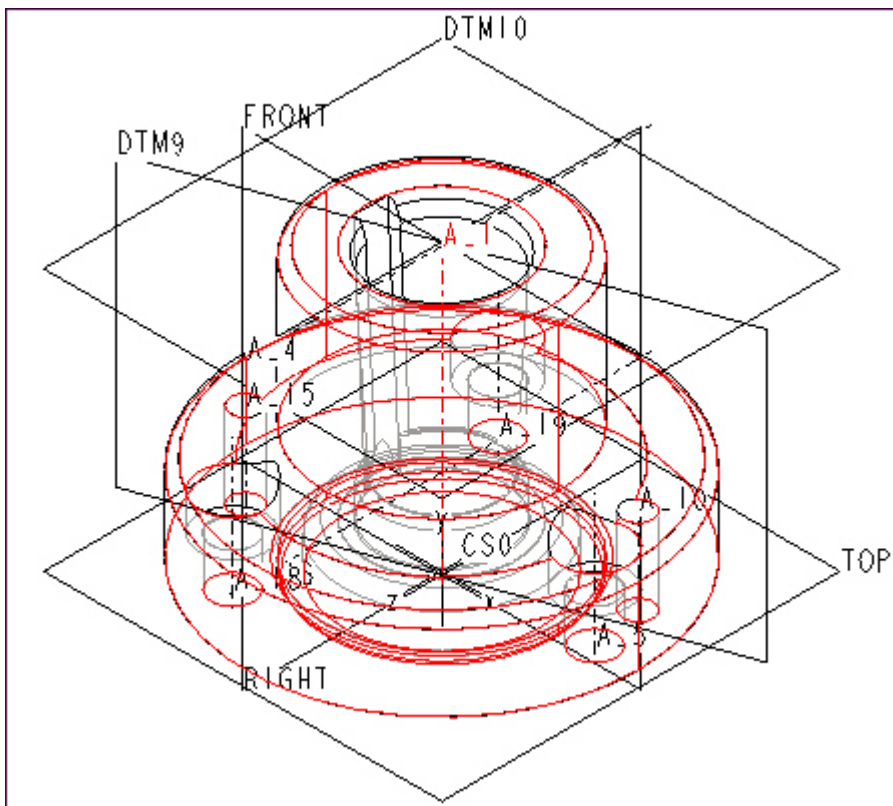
Taper Coupling Model with Datum Planes
